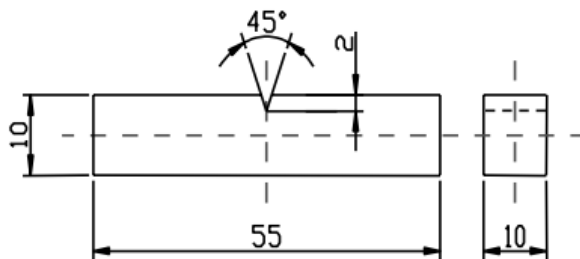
; Impact Test Specimens as per ASTM E23-96 [5]
